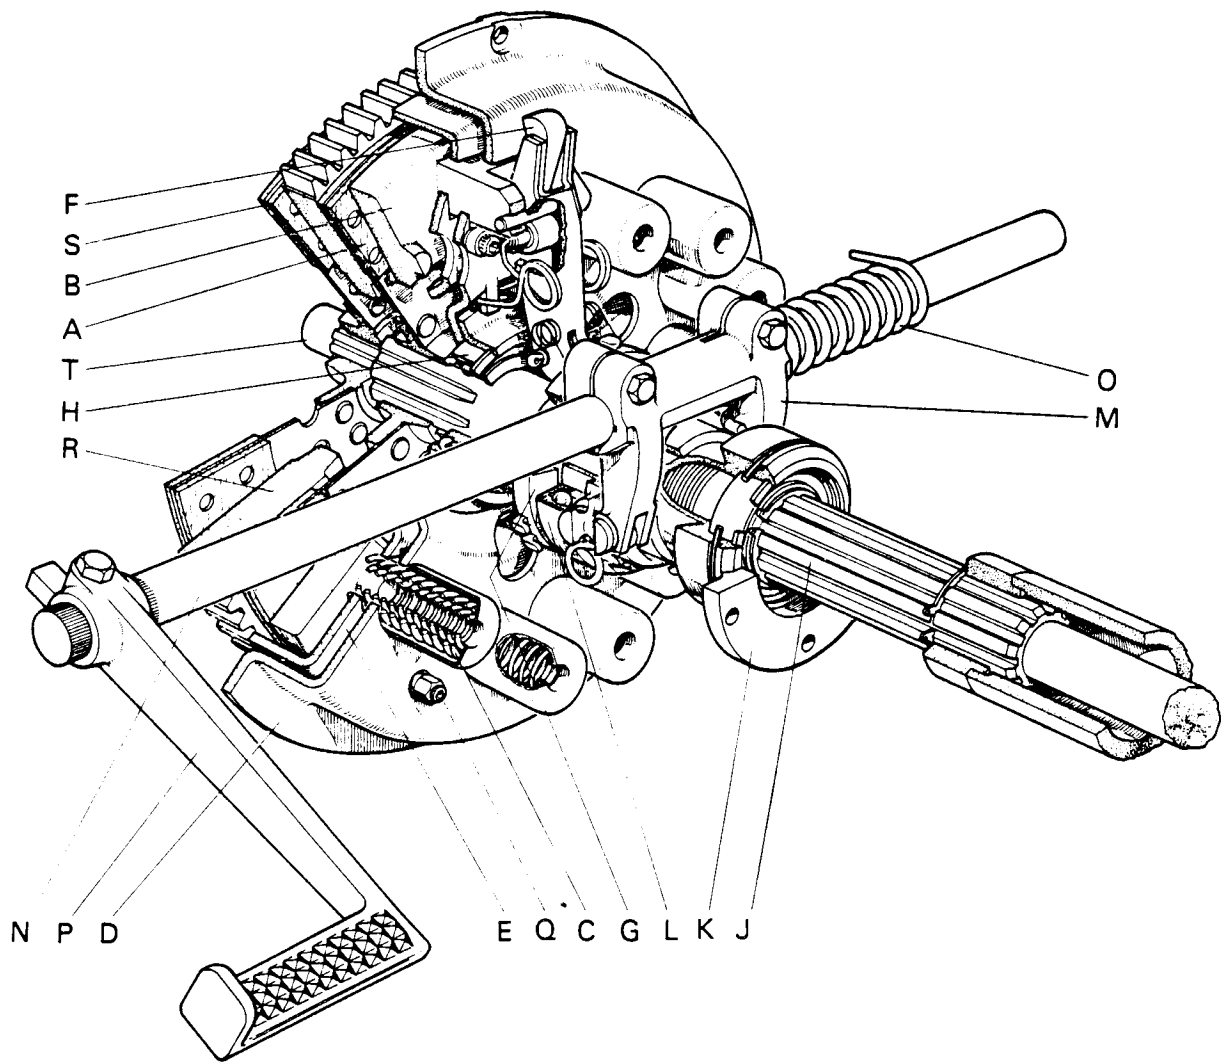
DOUBLE CLUTCH — 770 TRACTOR
